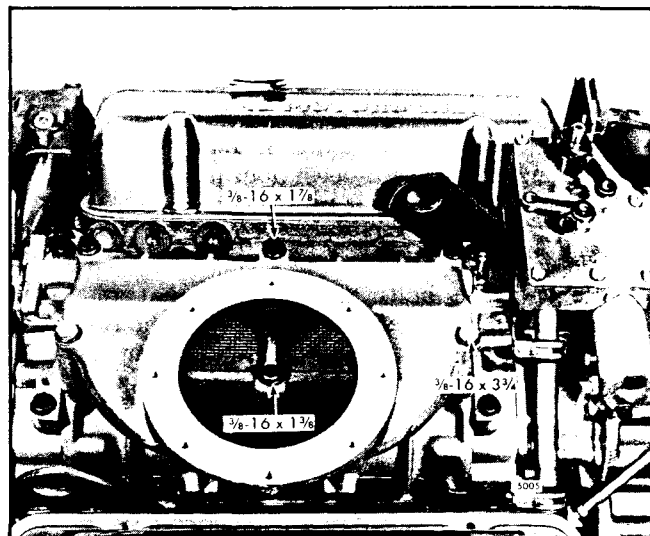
Location of Air Shut-Down Housing Mounting Bolts (6V Engines)
